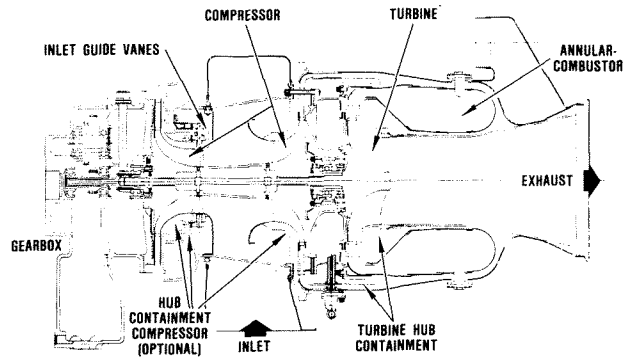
ADVANCED APU WITH SHAFT DRIVEN LOAD COMPRESSOR AND ACCESSORY GEARBOX
